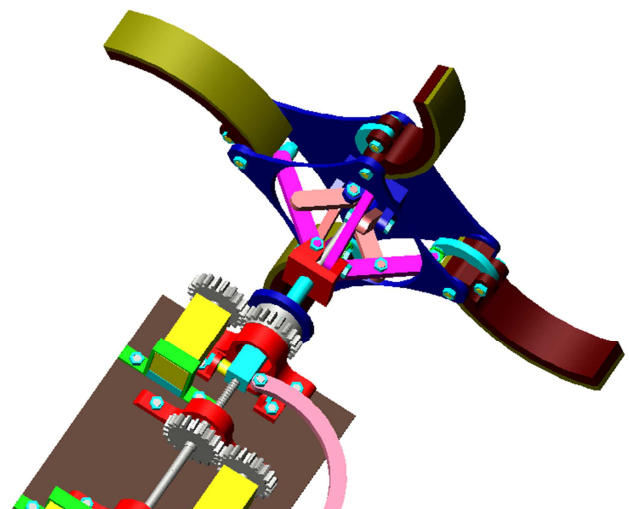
Close view of slider link mechanism by removing conical cover while expanded wheel.
